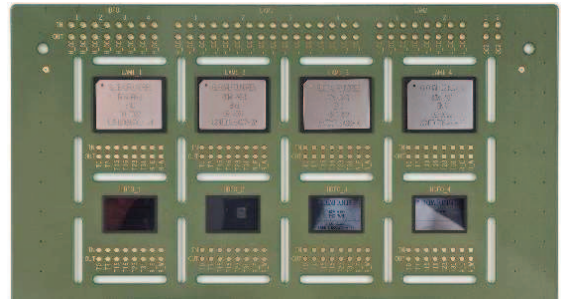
HDFO and FC-CSP packages mounted on daisy-chain PCB.
